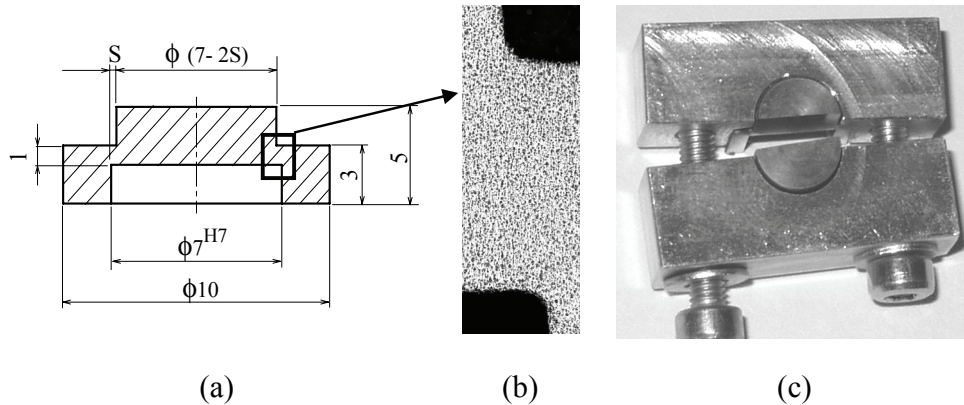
(a) Hat-shaped cylindrical shear specimen, (b) the relevant shear zone and (c) the two-half specimen for step loading.
